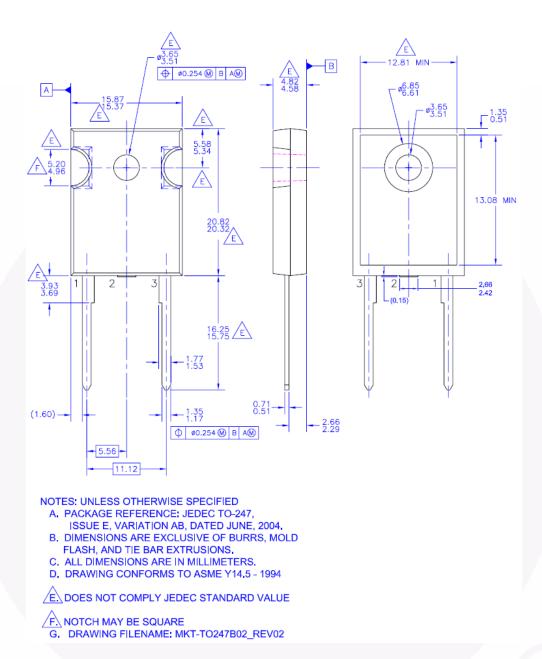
TO-247 2L - TO247, MOLDED, 2LD, JEDEC OPTION AB
